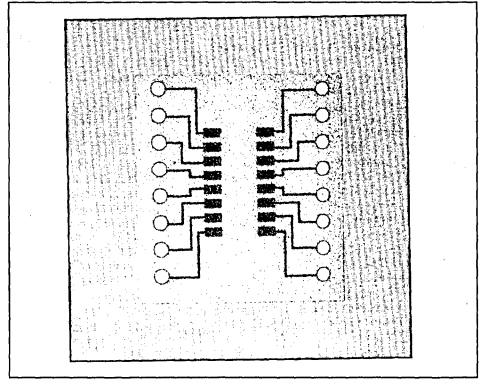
Figure K : Test Board Lay-out for SO Packages (3000 mils body width)
